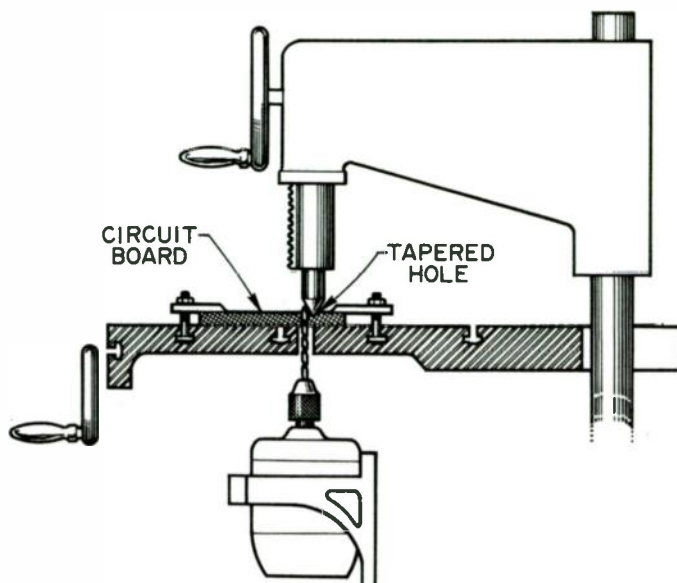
View of a circuit drill showing the stylus seated into the locator hole of the template.
